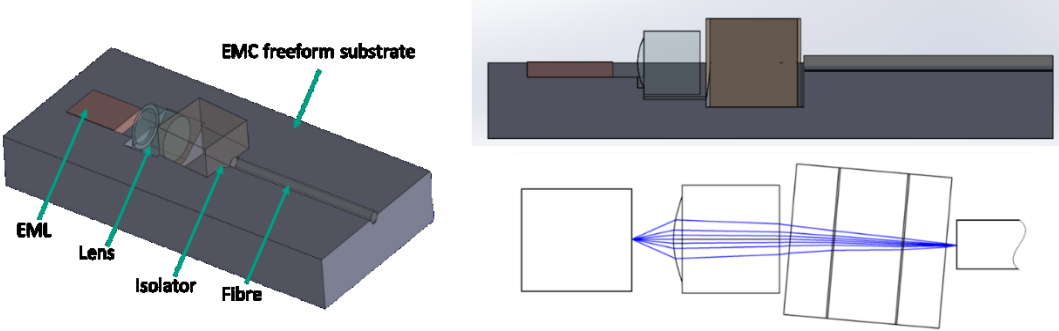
First package design featuring all components and spatial arrangement; Isometric view of premold package and assembled optical components (left); cross sectional view of assembly (top right); top view of optical path of the assembled system (bottom right)
